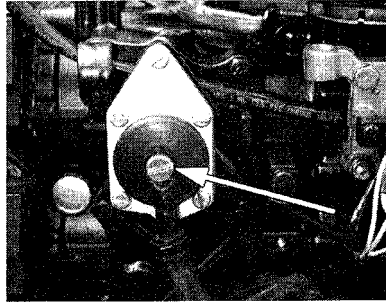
Remove the bolt(s) securing the Type A pump cover...
